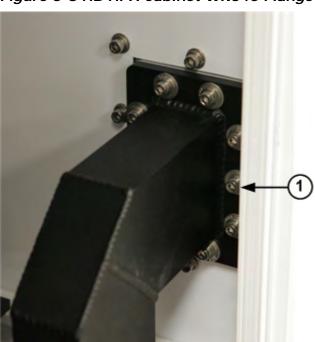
HB HPA Cabinet WR340 Flange Connection
